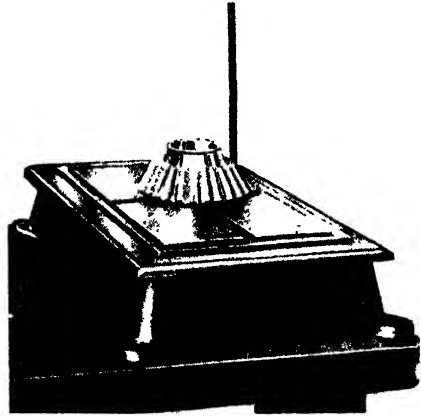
PLATEN TYPE OF DEMAGNETIZER
